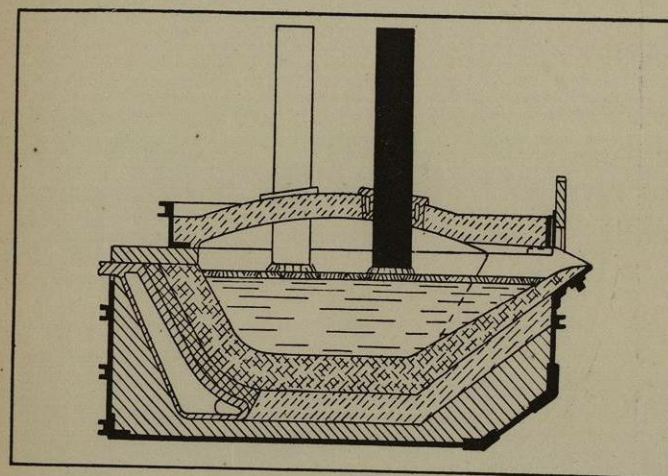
Härden's Paragon Furnace in sectional elevation.
